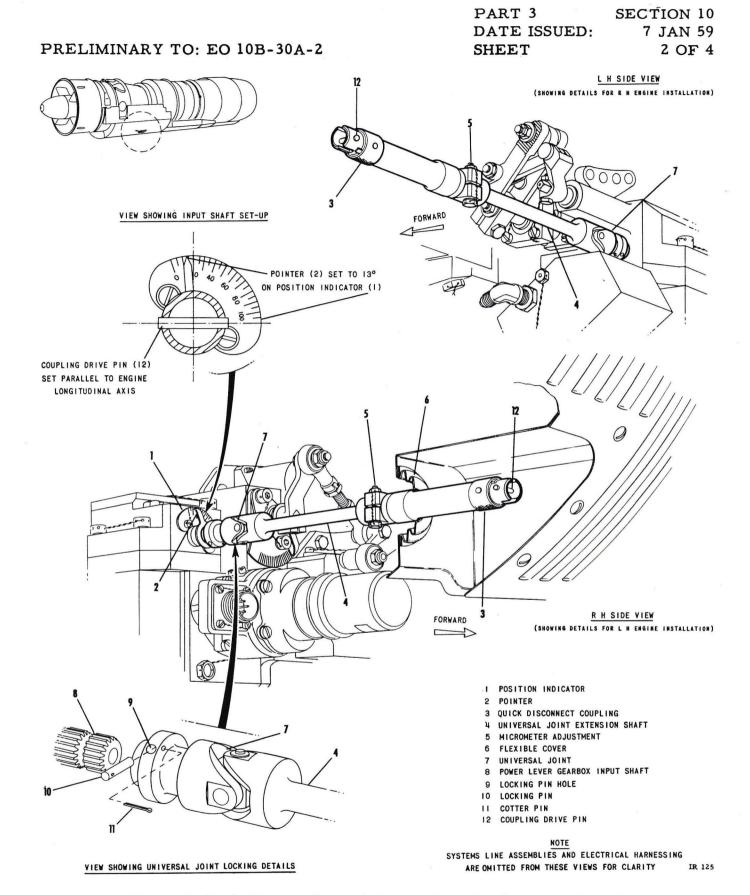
Power Control Lever Input Shaft Set-up Details
